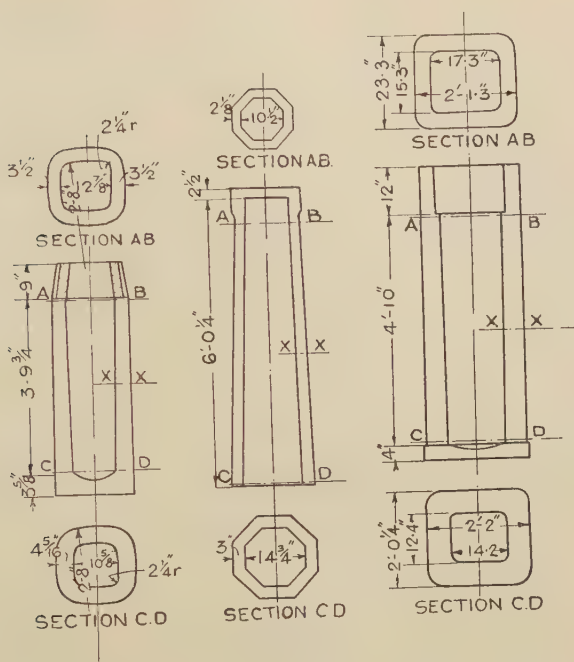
Mould A. FIG. 2.—Mould B. FIG. 3.—Mould C.
